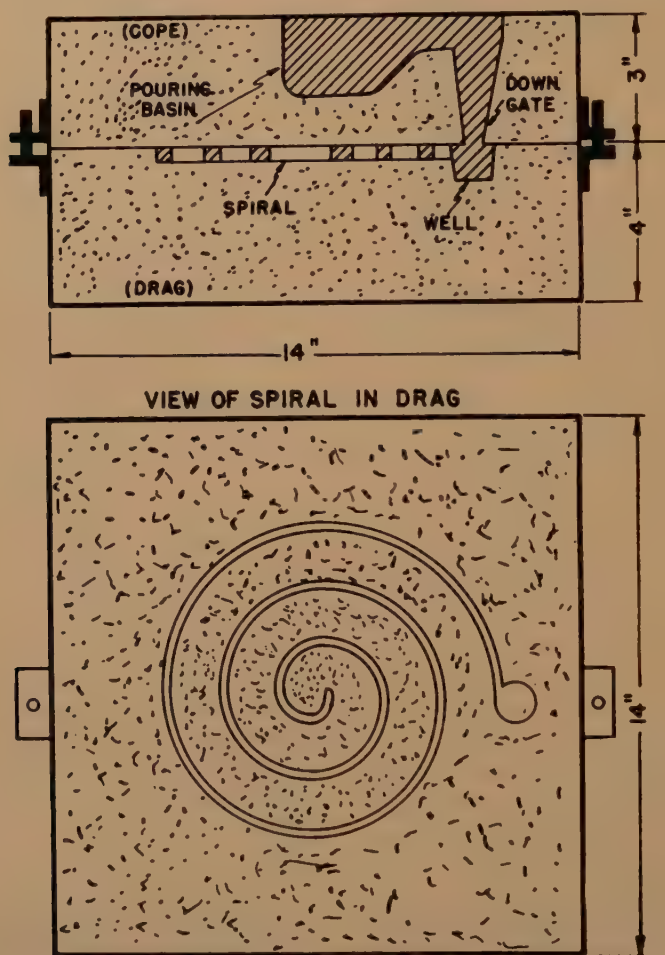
SCHEMATIC DRAWINGS OF A MODIFIED BUREAU OF STANDARDS SPIRAL FLUIDITY TEST PATTERN.
